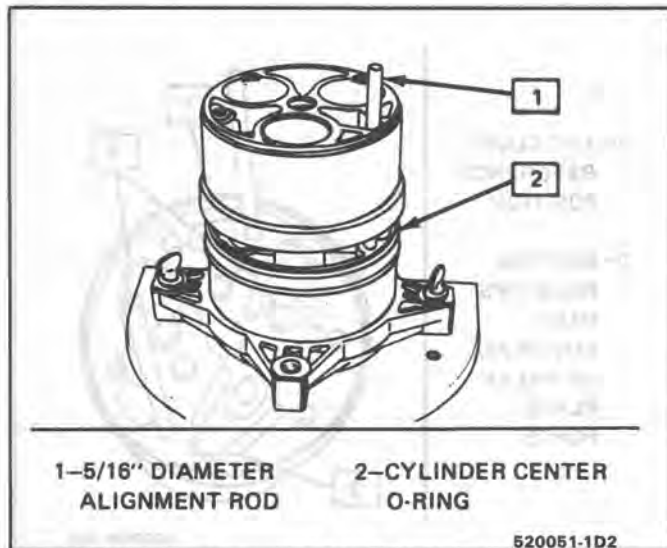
Cylinder Alignment Rod Through Cylinder Halves
